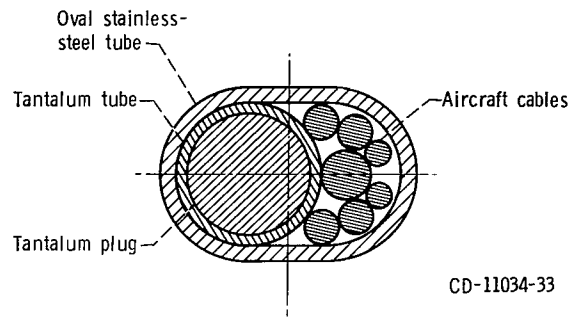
Cross section of tantalum/stainless-steel tube pair with small-diameter, stainless-steel aircraft cables inserted for coiling plug section.
